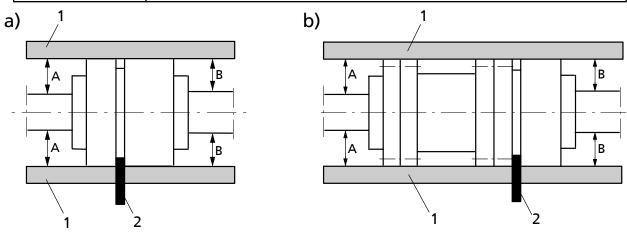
a) Checking the coupling alignment and b) Aligning the spacer-type coupling
